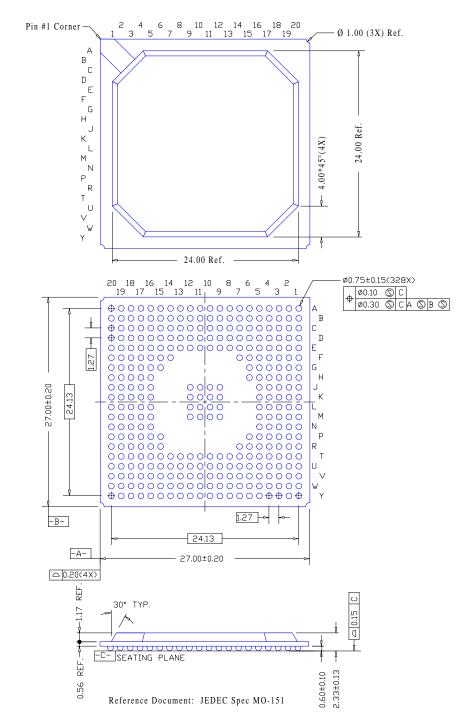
Mechanical Specifications - 328-Pin Ball Grid Array Package
